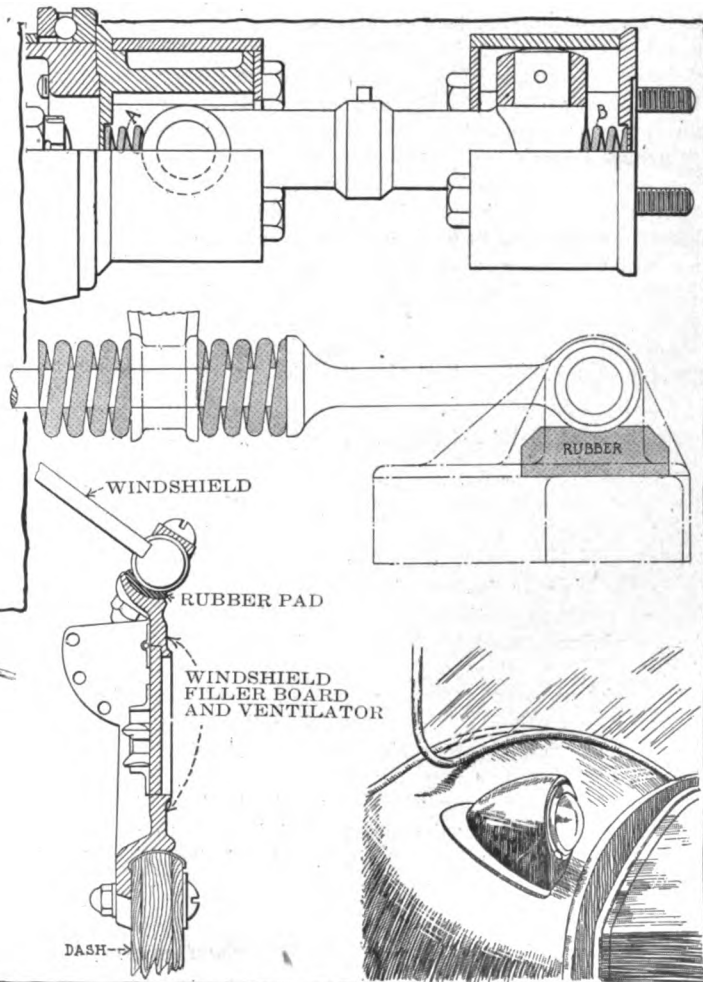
Top, springs A and B in floating member of universal joint, torsion bumper rod. Bottom, left to right, spring fitted to drag link, spring bottom pan holder, padded windshield connection, non-rattling lamp
